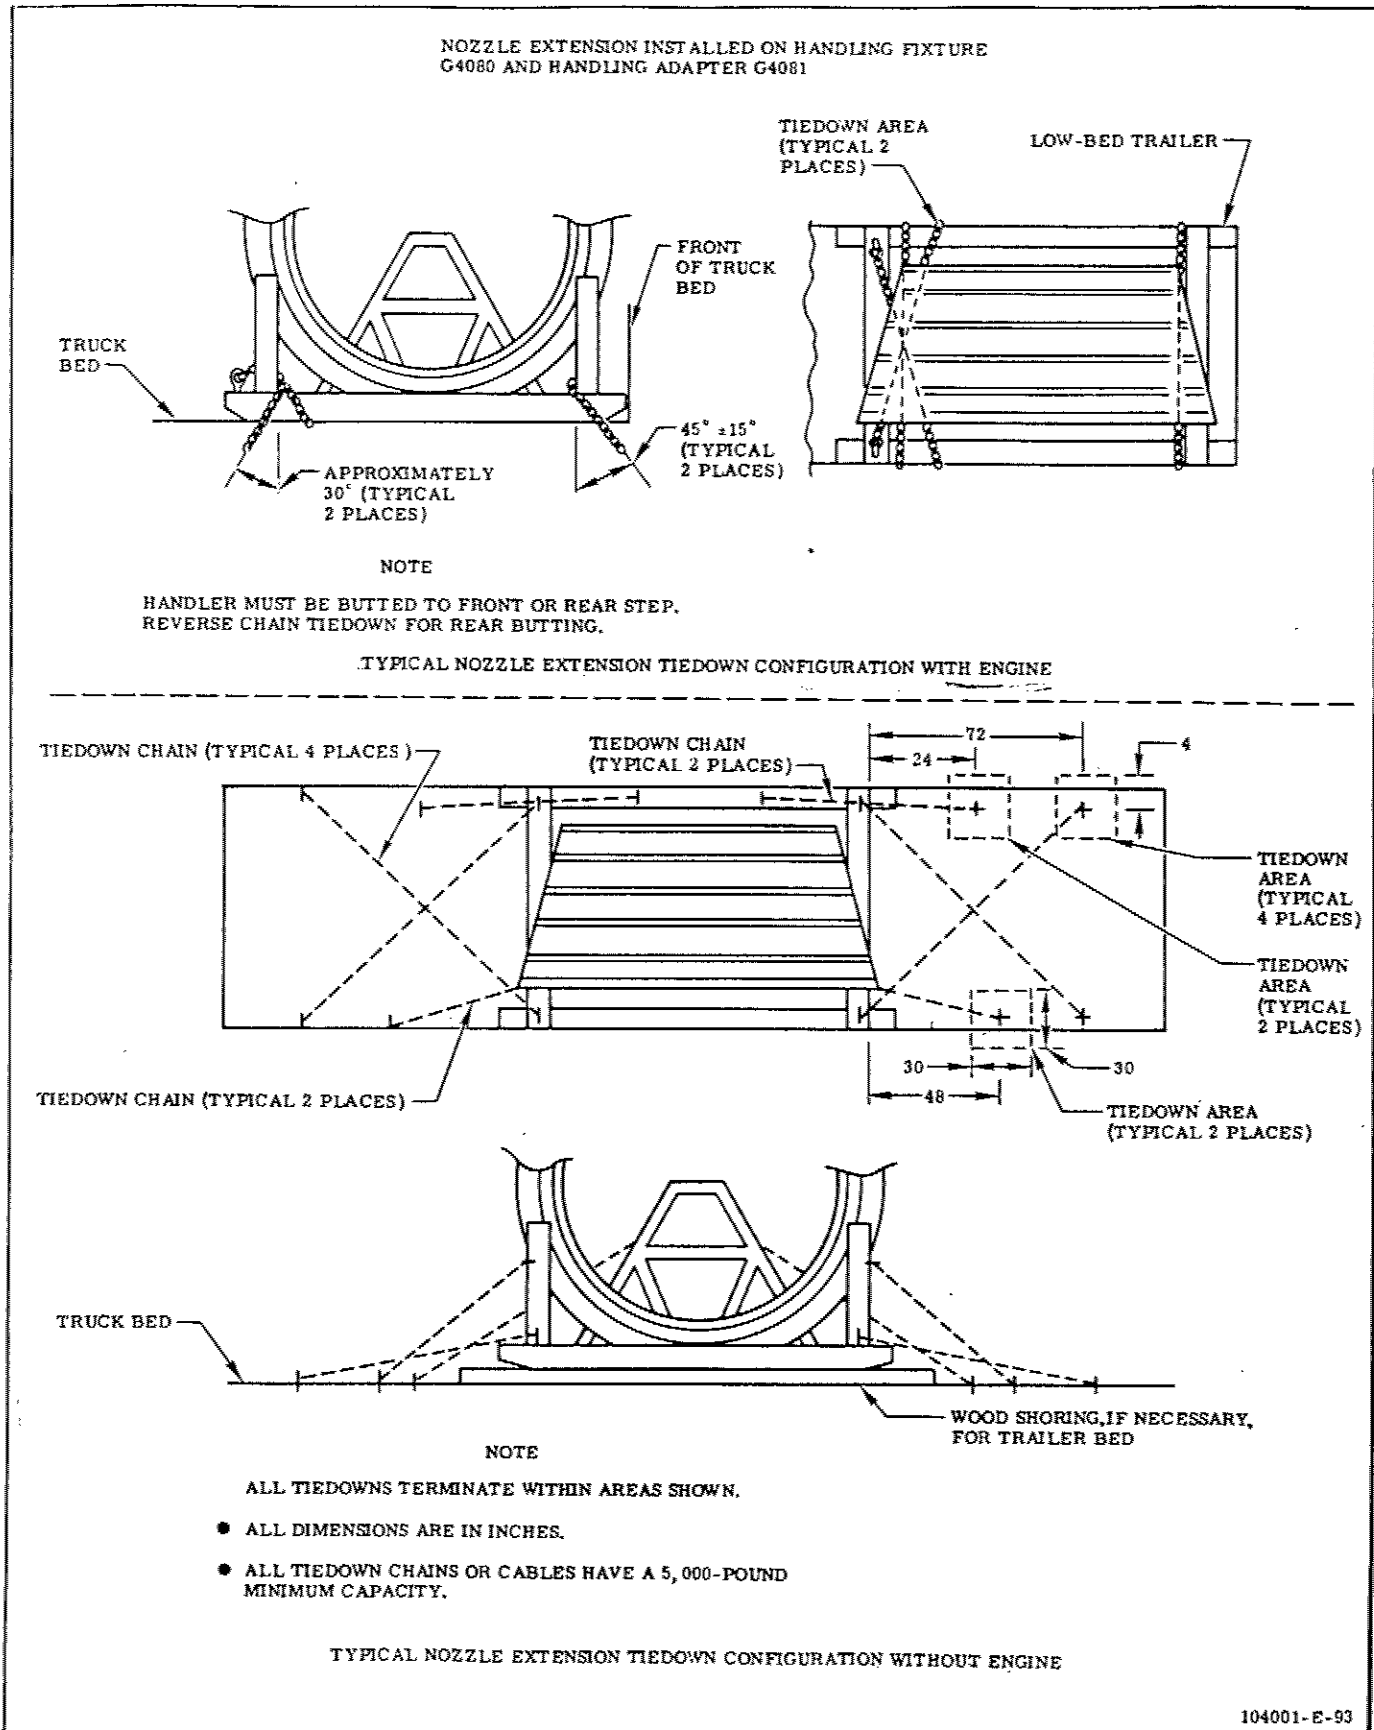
Loading Engine and Nozzle Extension on Low-Bed Trailer (Sheet 3 of 3)
